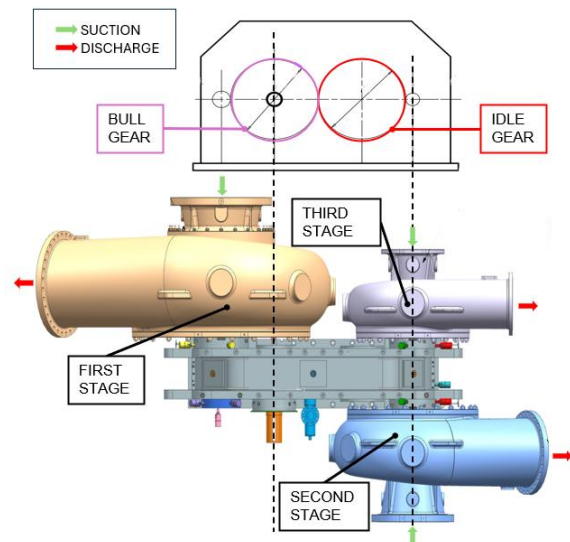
GEAR SKETCH AND COMPRESSOR ARRANGEMENT.
